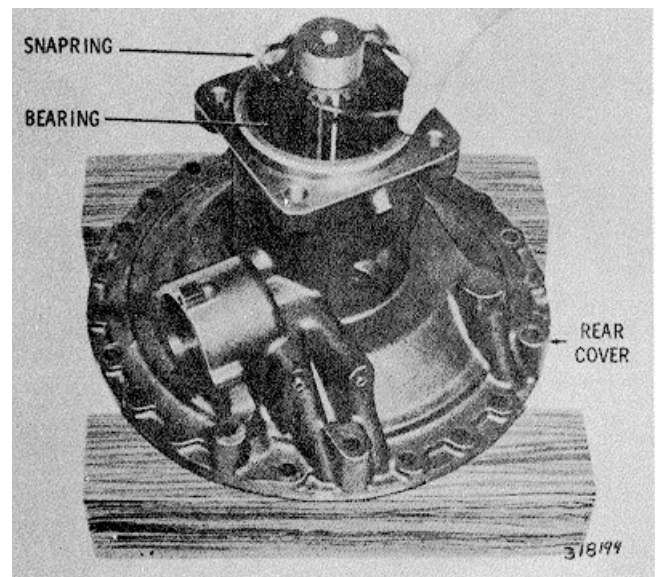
Removing (or installing) output shaft bearing snapring
